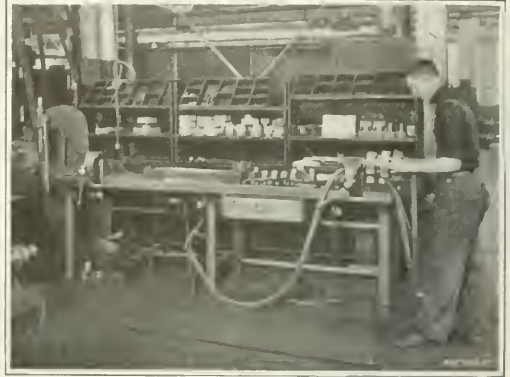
Shaft Assembling Bench with Three Stock Racks in Place
